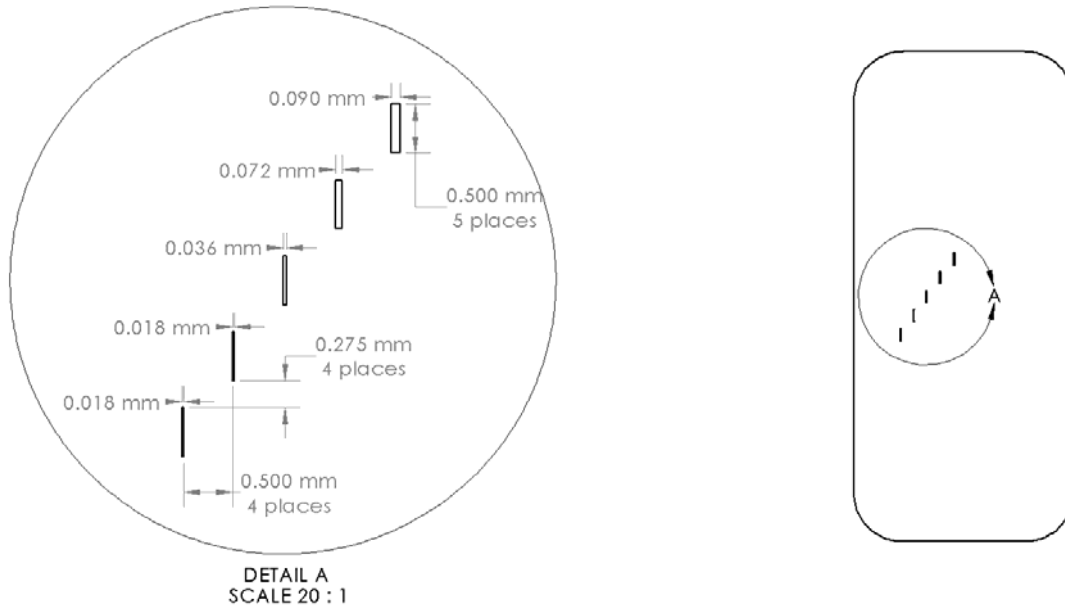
Mechanical CAD drawing of multi-slit plate rev 0.
